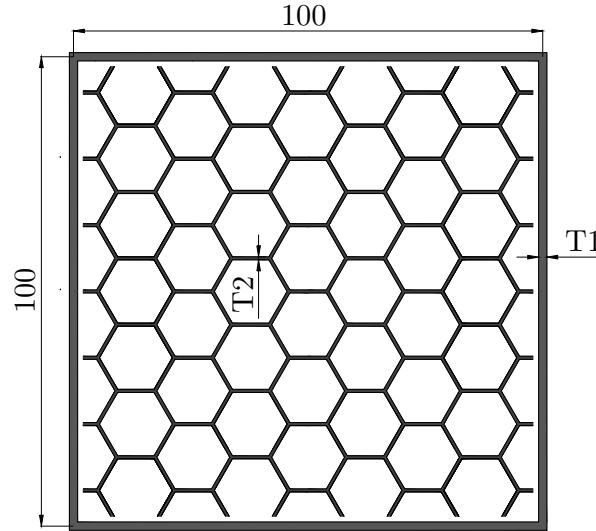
Top view of the specimen. All dimensions in millimeters.
